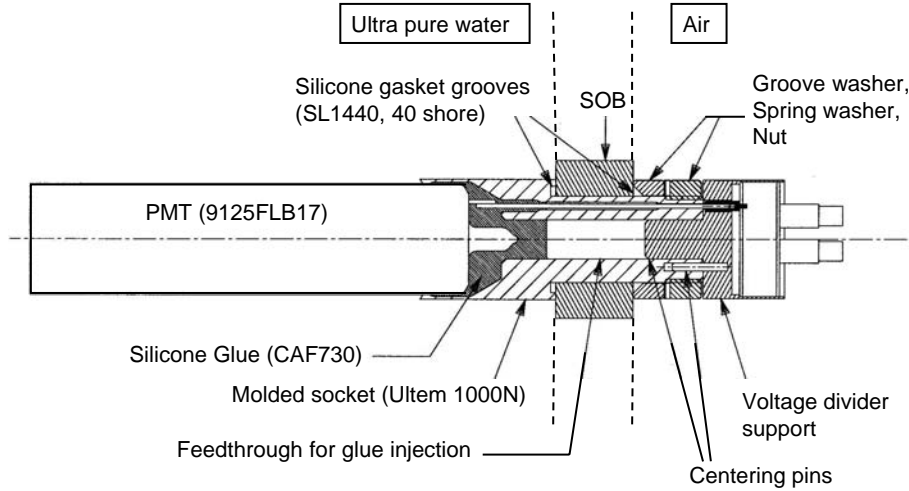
Cross section of the PMT feedthrough assembly mounted to the sector bulkhead.
